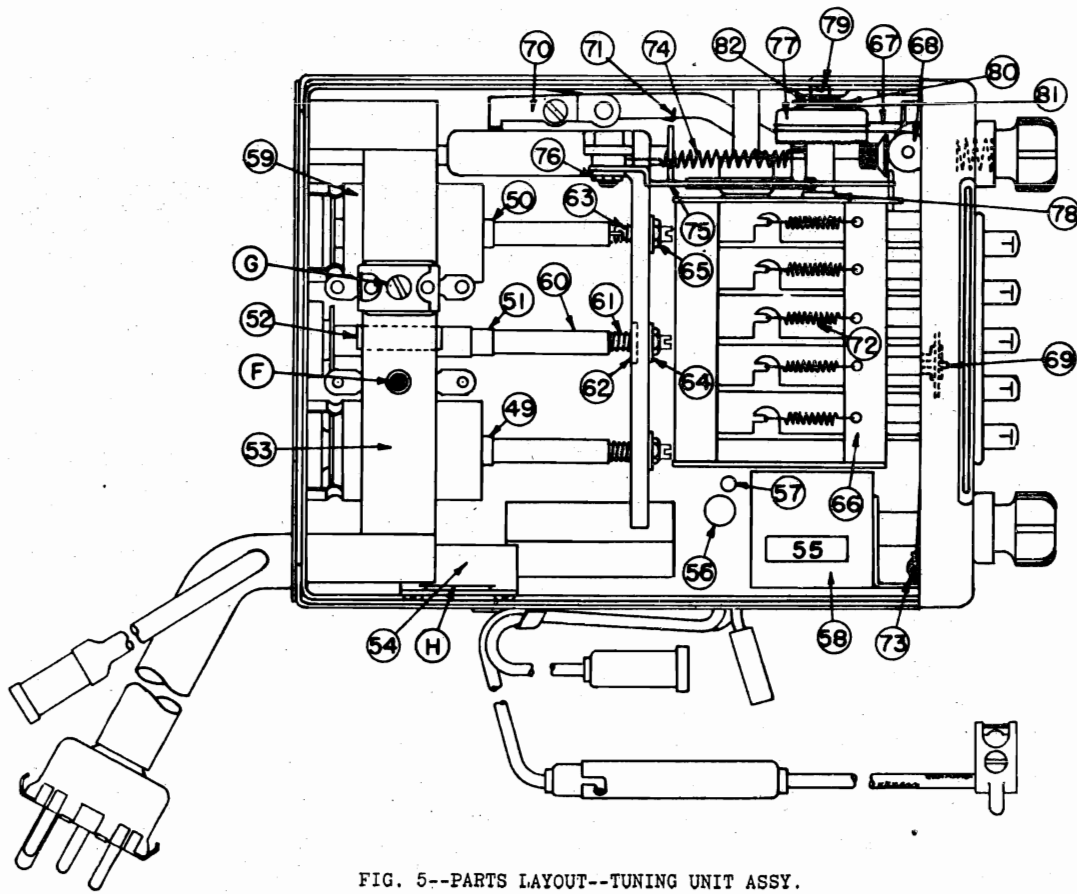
PARTS LAYOUT--TUNING UNIT ASSY.
